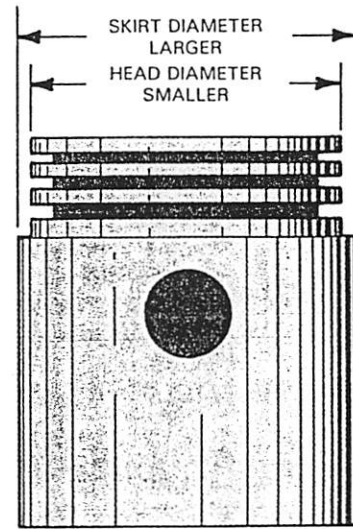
As piston head is hottest part of piston, it must be ground approximately .030-.040 in. (0.76 to 1.02 mm) smaller than skirt.
